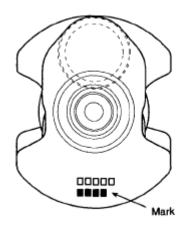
Identifying Connecting Rod Mark Location Courtesy of HYUNDAI MOTOR CO.
